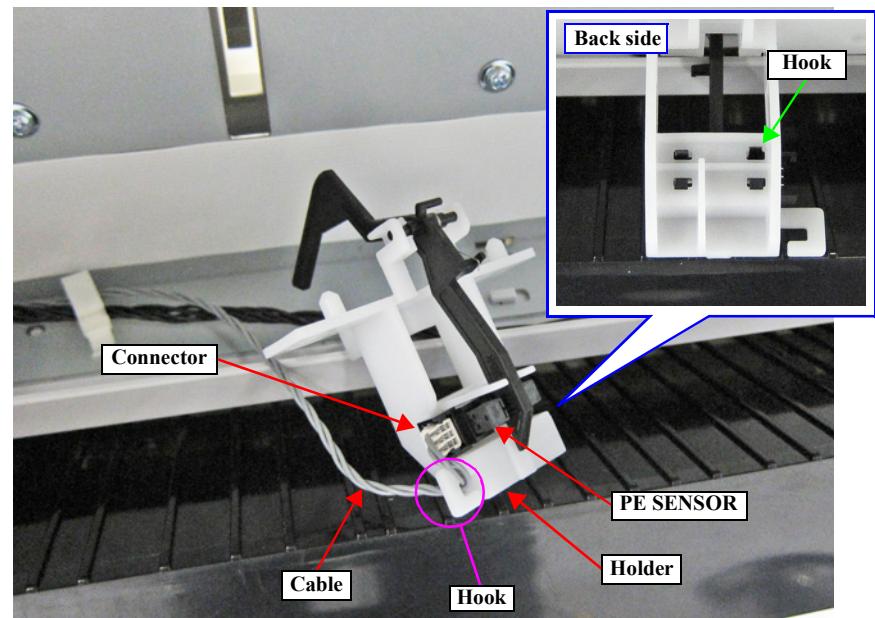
Removing the PE SENSOR (ROLL PAPER)
